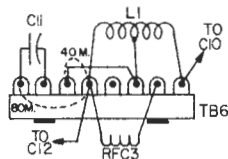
Sketch showing connections to sub-assembly TB_6 . See text.
